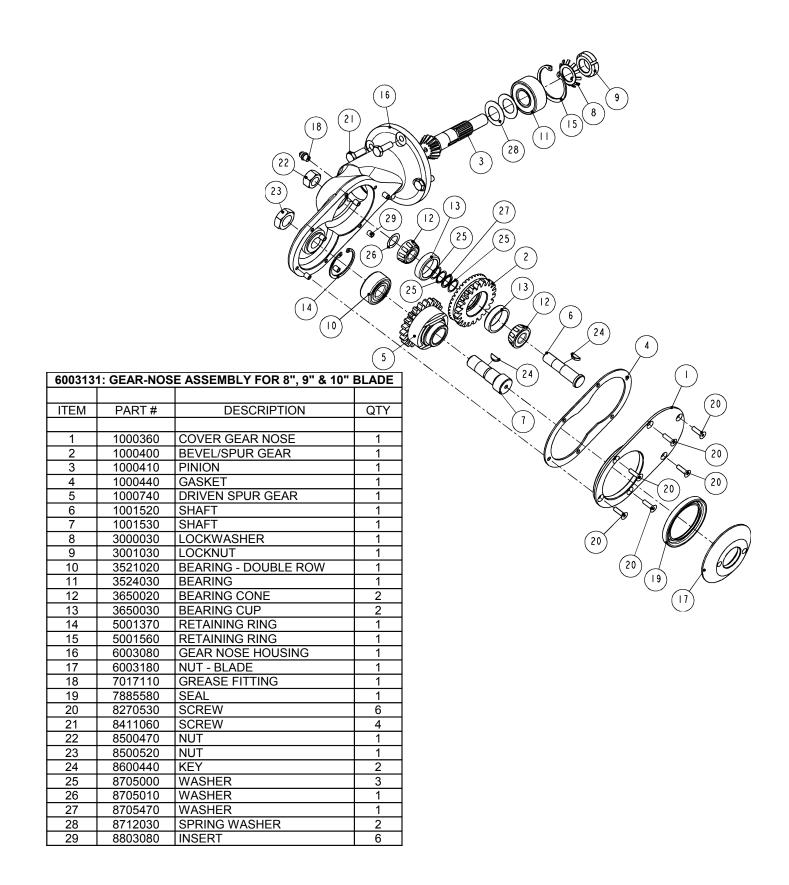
GEAR-NOSE ASSEMBLY FOR 8", 9" & 10" BLADE
